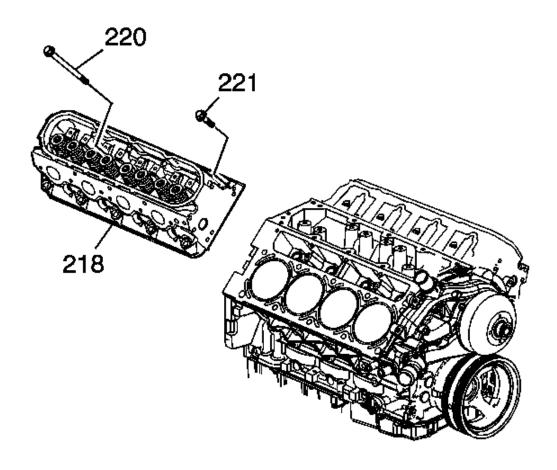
View Of Cylinder Head & Bolts Courtesy of GENERAL MOTORS CORP.
